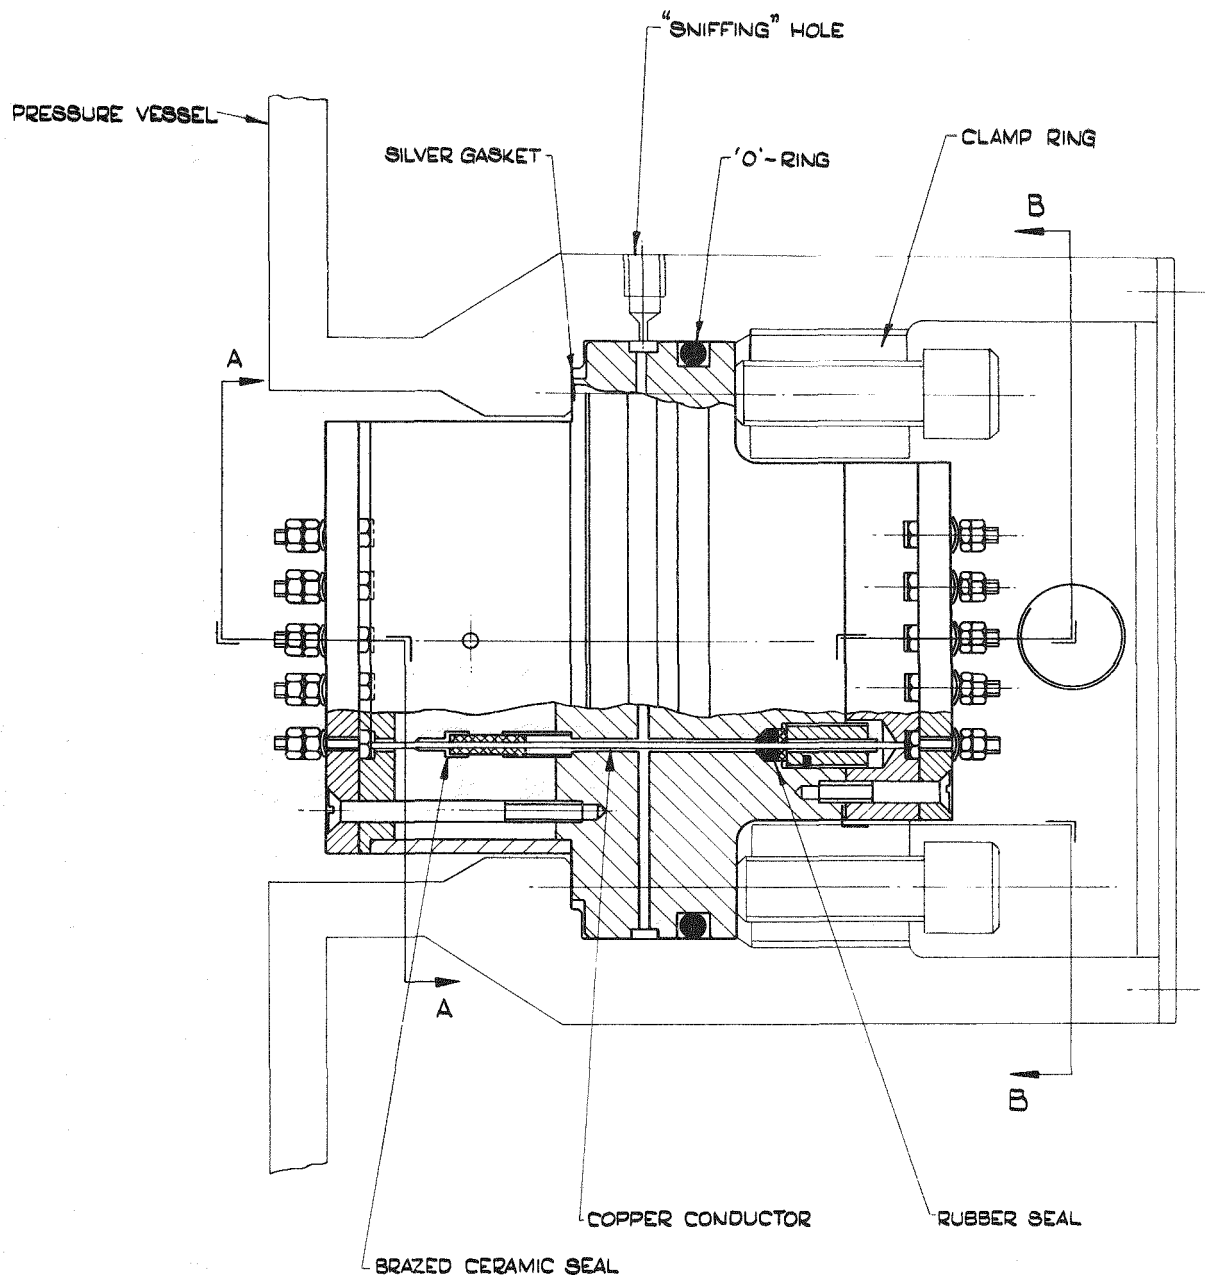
ELECTRICAL PENETRATION ASSEMBLY
